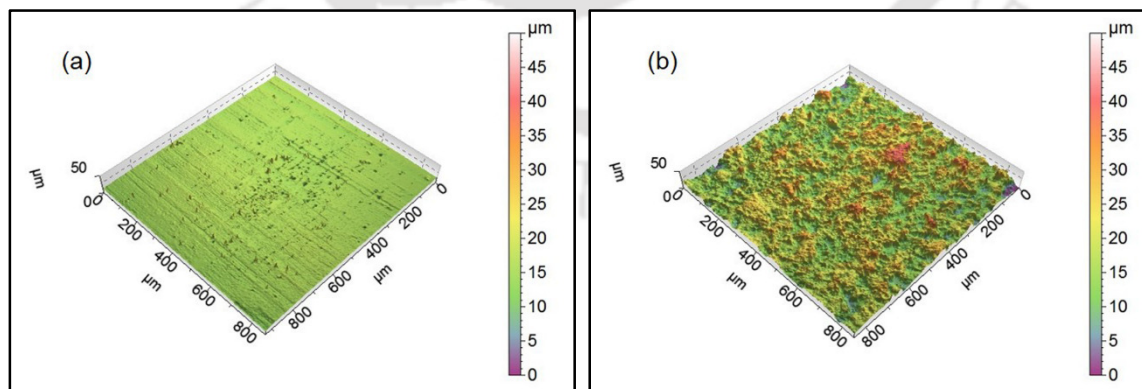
Three dimensional profiler image of (a) conventional machined gear tooth surface and (b) gear tooth surface manufactured by WEDM
